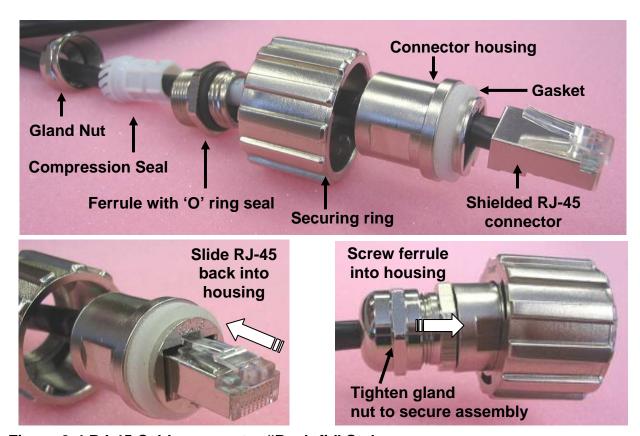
RJ-45 Cable connector "Push fit" Style
